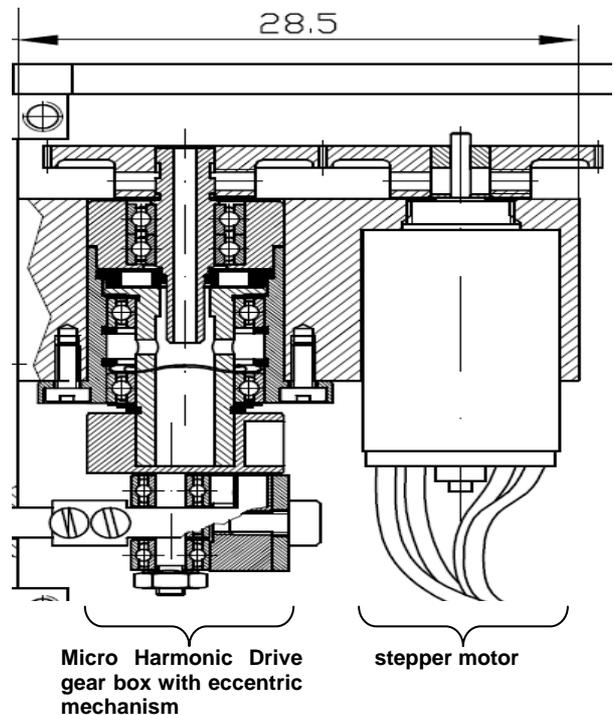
Mechanical setup of drive chain for linear motion of optical lens.
